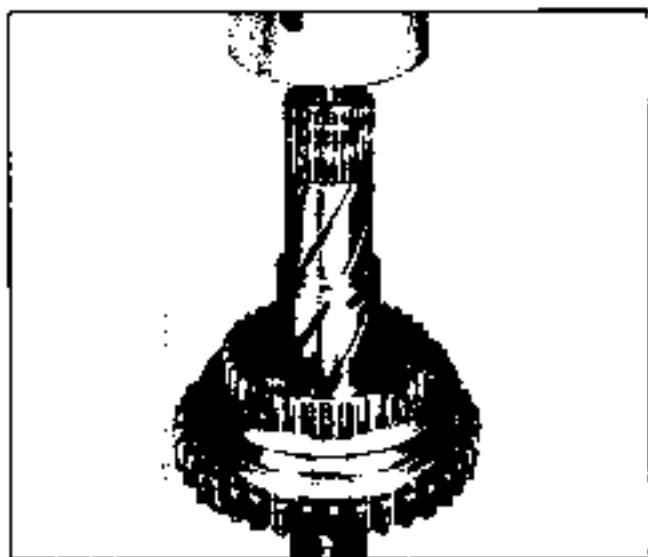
A-16 Removing Reverse Synchronizer Hub and Sliding Gear
